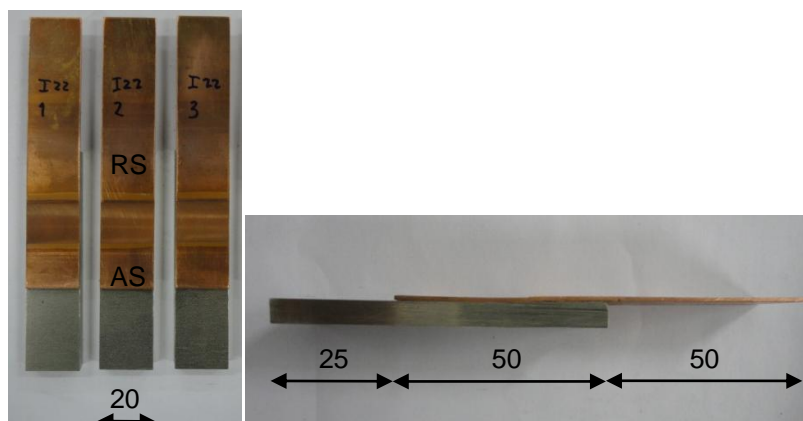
Test specimens I 22 (dimensions in mm).
